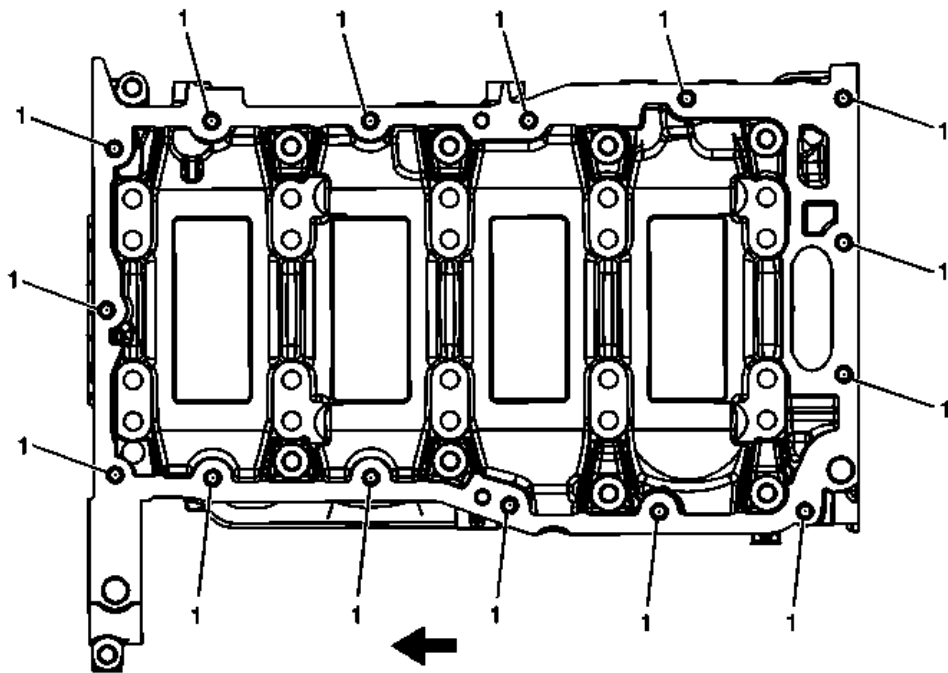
Locating Bolts On Lower Crankcase - Bottom View
